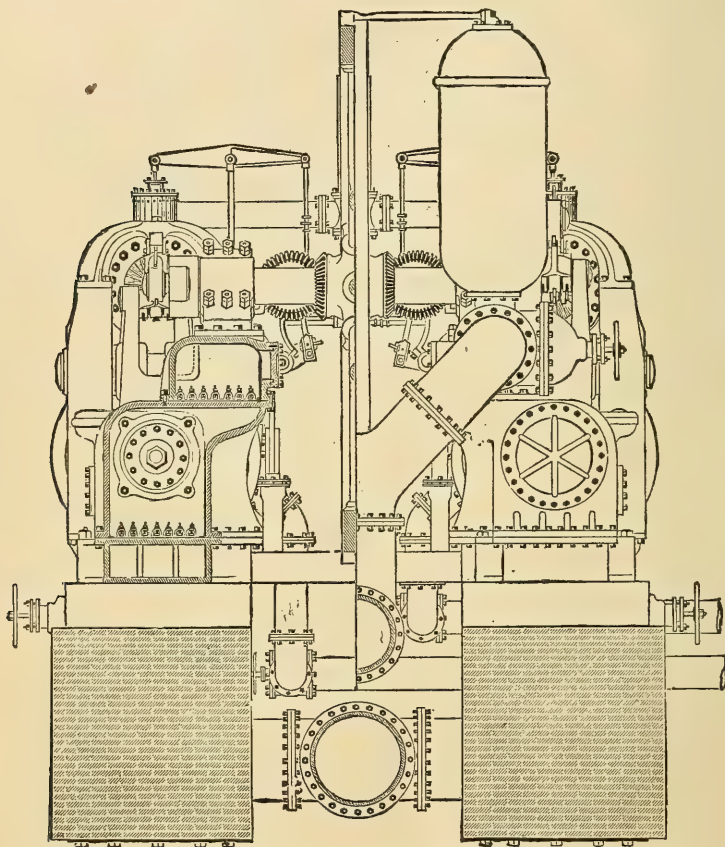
SECTIONAL AND EXTERNAL END VIEWS OF PUMPS.—Holly-Gaskill Pumping Engine, Saratoga Springs Water Works.
